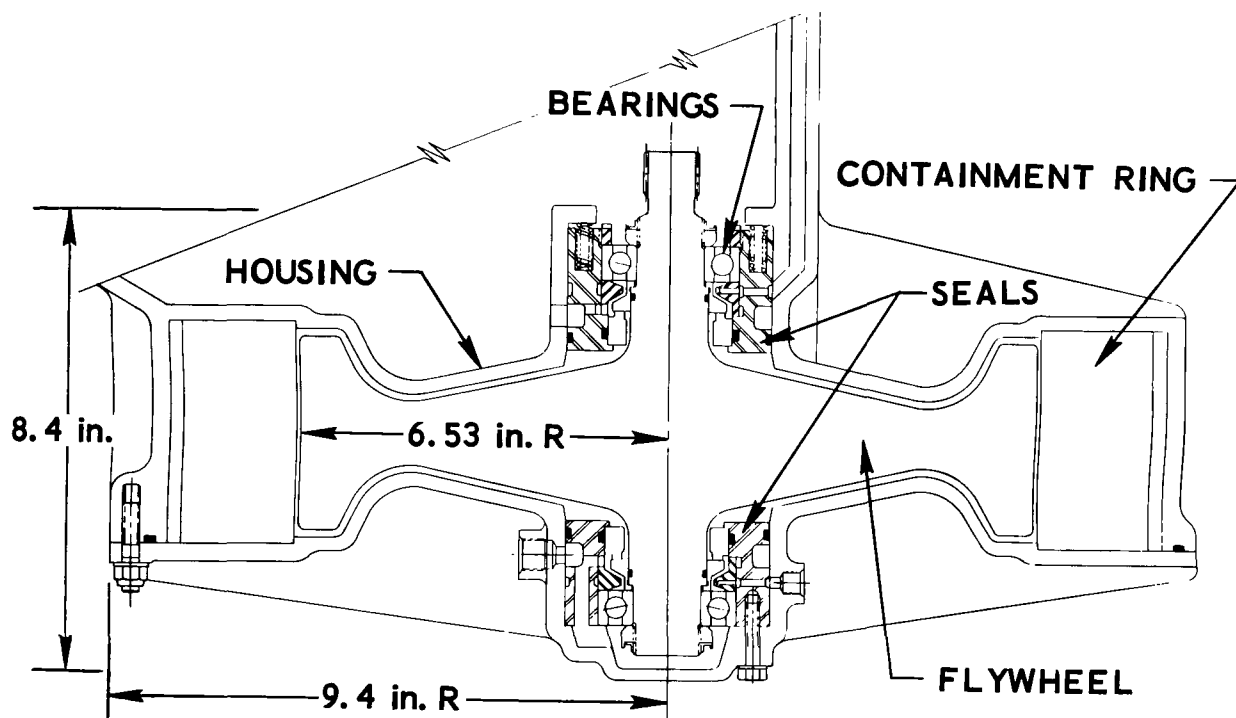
Lockheed Baseline Flywheel (Ref. 3-4)
